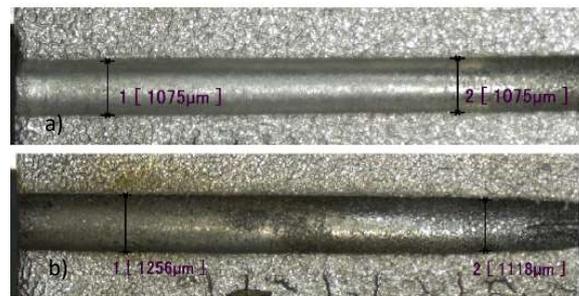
Cross section of the bore holes: a) near dry EDM b) wet EDM.
